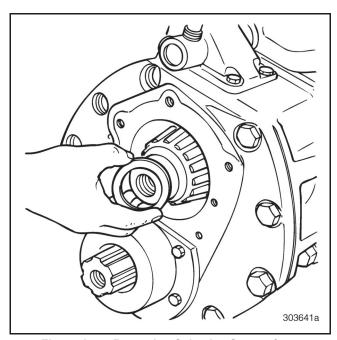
Removing Selective Spacer from Front-Drive Shaft
